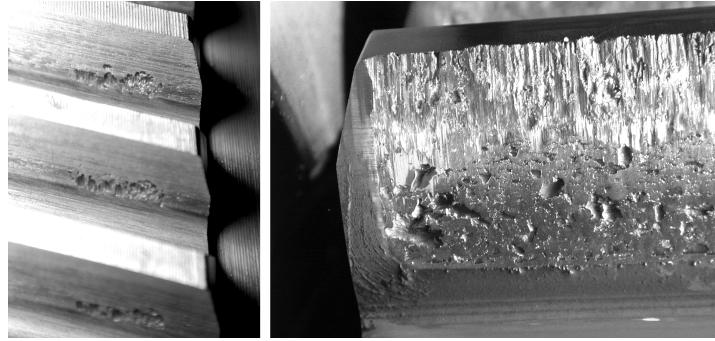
Pitting failure on one side of the gear due to the lack of parallelism of the shaft supports of a gearbox housing
